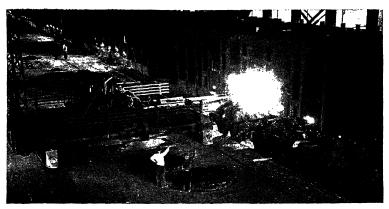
Charging machine placing scrap metal in open-hearth furnace. The scrap is in the charging boxes on small cars running from the center right to the lower right of the picture. The charging machine operates on rails along the front of the furnaces. (Bethlehem Steel Co.)
